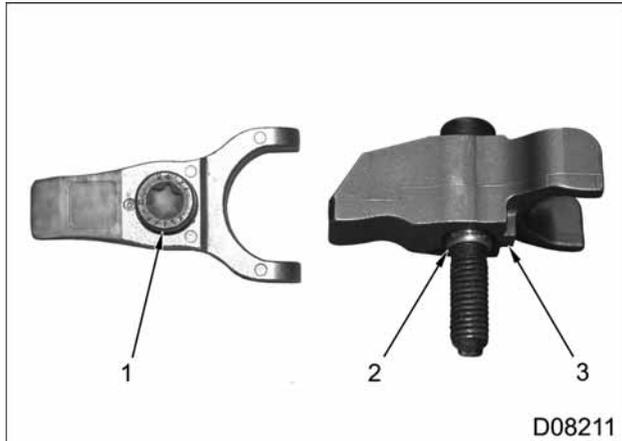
Fuel injector hold down clamp assembly (2004 and 2005 cylinder head applications)
